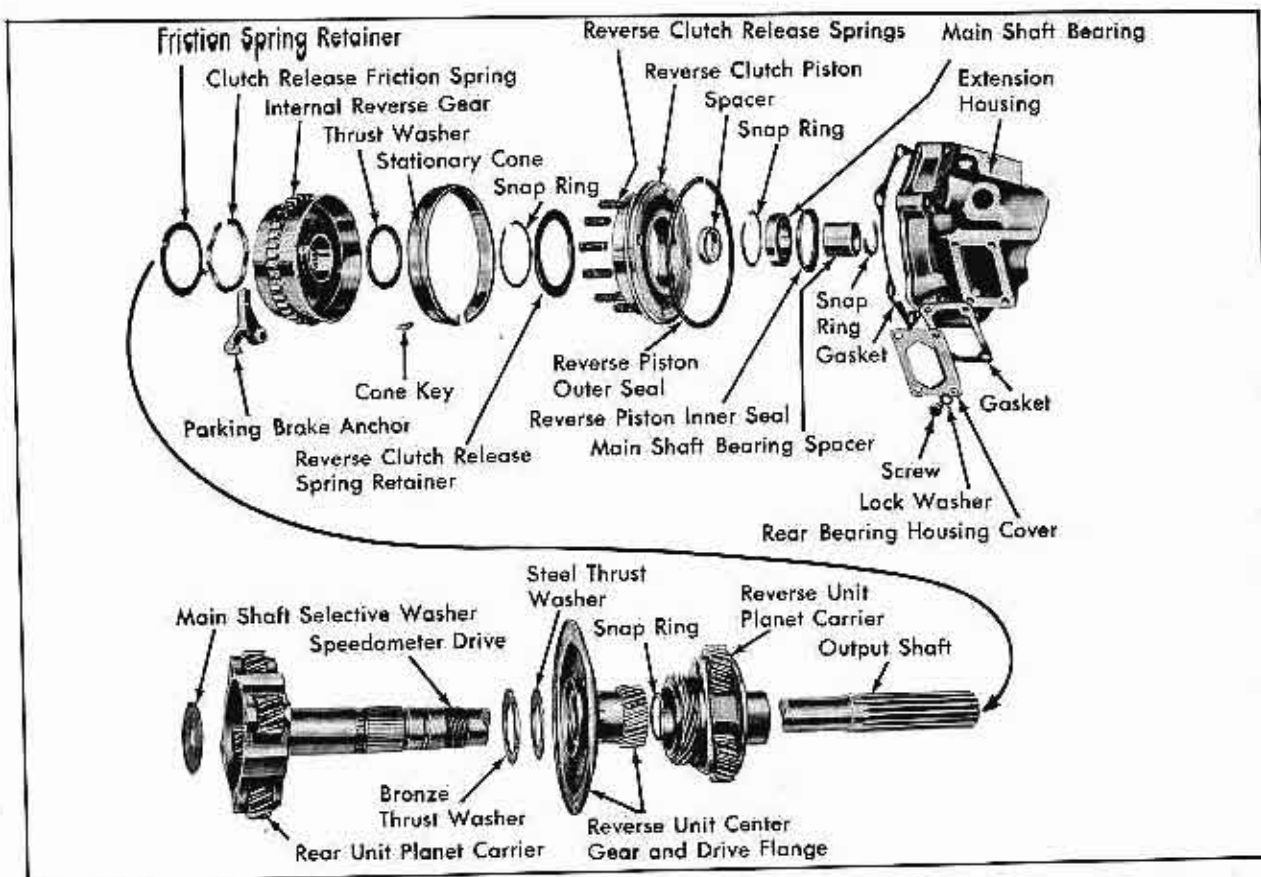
Output Shaft and Reverse Assembly - Disassembled
